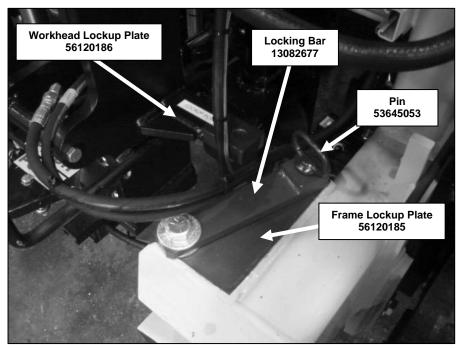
Unlocked or Work Position – Pin inserted through Locking Bar and Frame Lockup Plate
